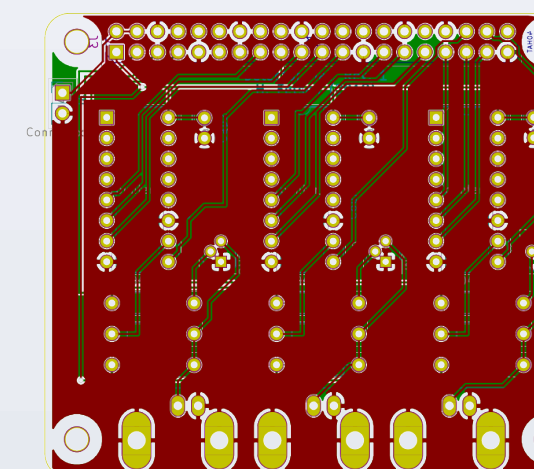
Layout of the printed circuit board (PCB) used for reading counts.
